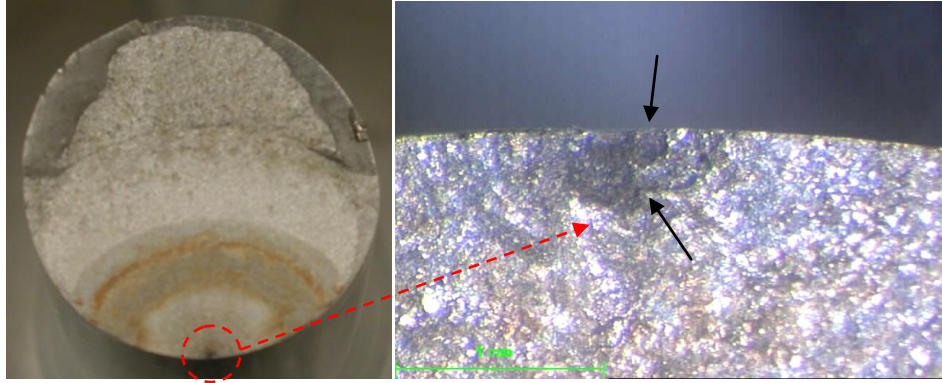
Larger scale fatigue specimen 1 - Fracture surface and flaw having caused the failure
